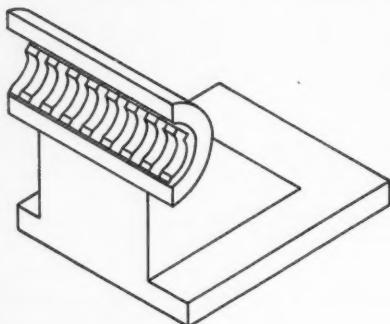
The Threads were Completely Removed and New Bronze Brazed In
